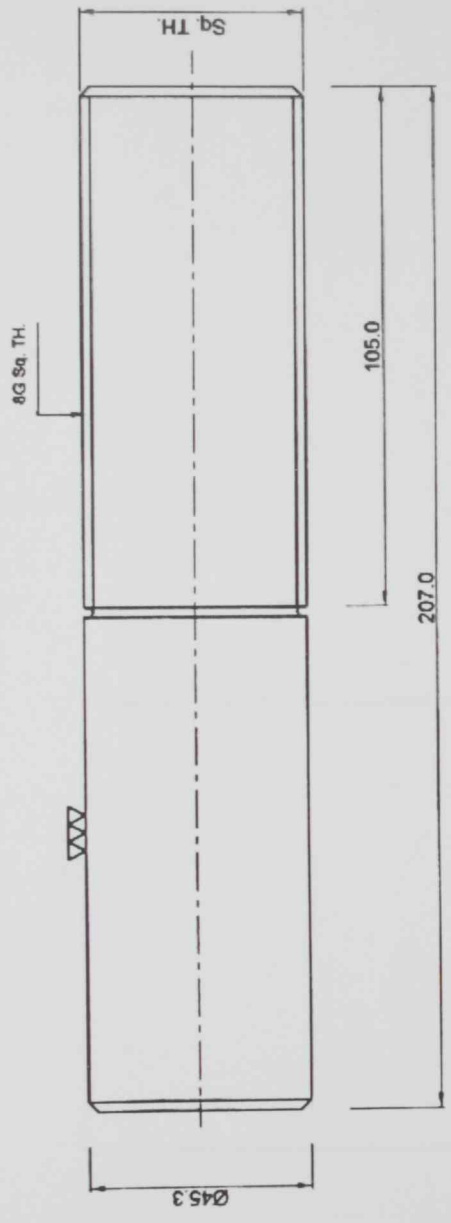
Cross sectional view for pipe specimen of notch depth =5mm
